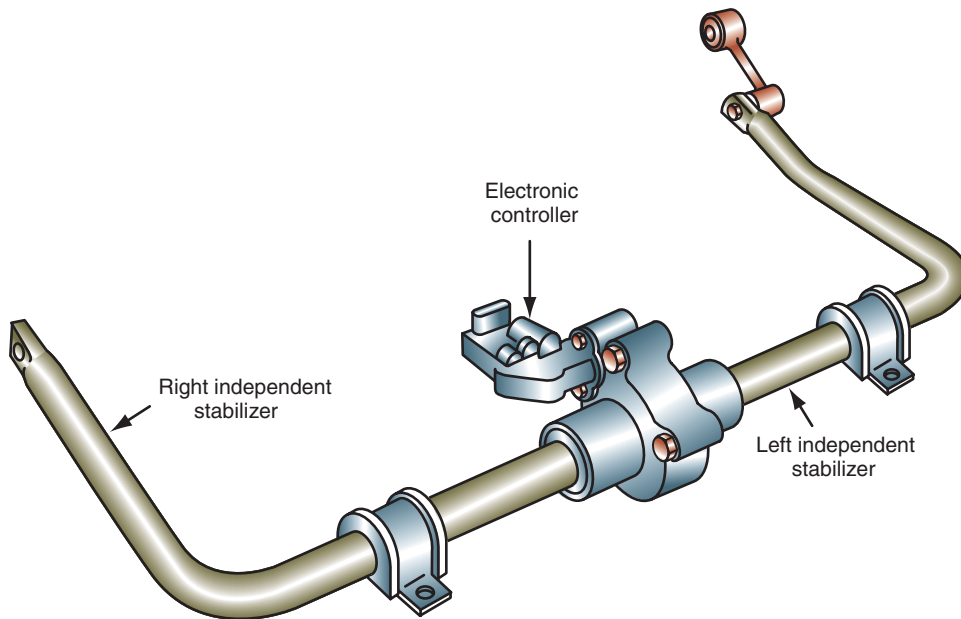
Stabilizer bar connected to the front struts.
